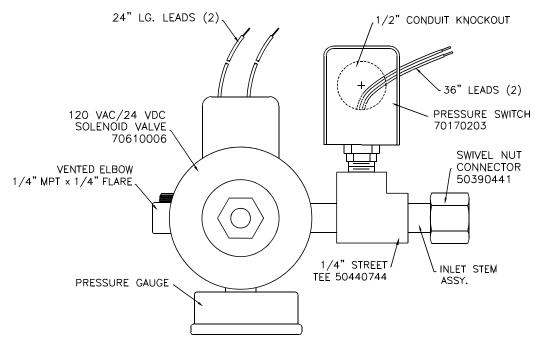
B - Solenoid Pilot Valve Assembly with Supervisory Pressure Switch (Top View) - S/N 20610277
